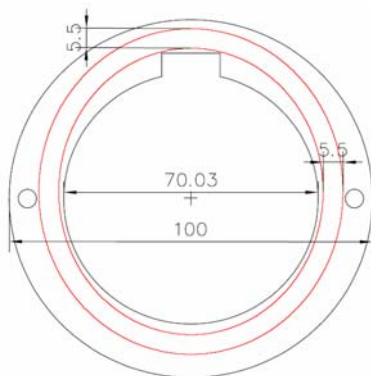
Geometry of the sheets of the wound-ring sample cut from the rotor sheets.
